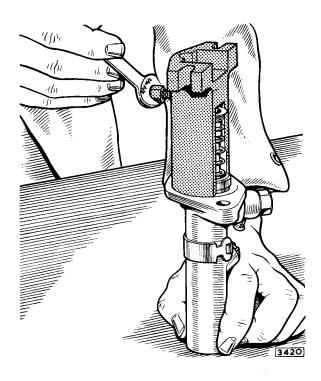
Depth setting the special tool, Tool No. J.26, on the master cylinder.
